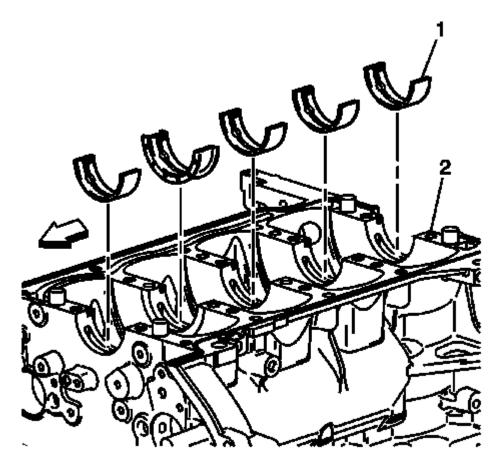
Upper Crankshaft Bearings Courtesy of GENERAL MOTORS COMPANY
